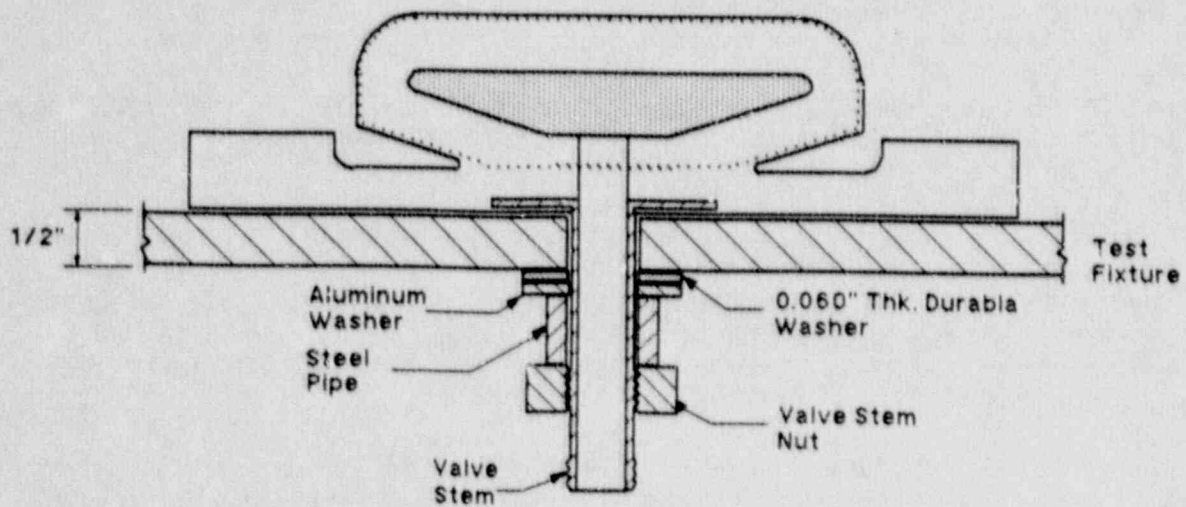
Section Through the Valve Stem on the Inflatable Seals Test Fixture
